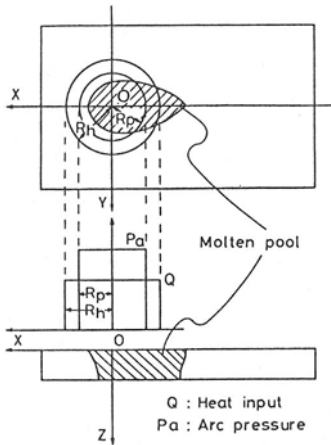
Model of molten pool for thin plate welding (Model I)
